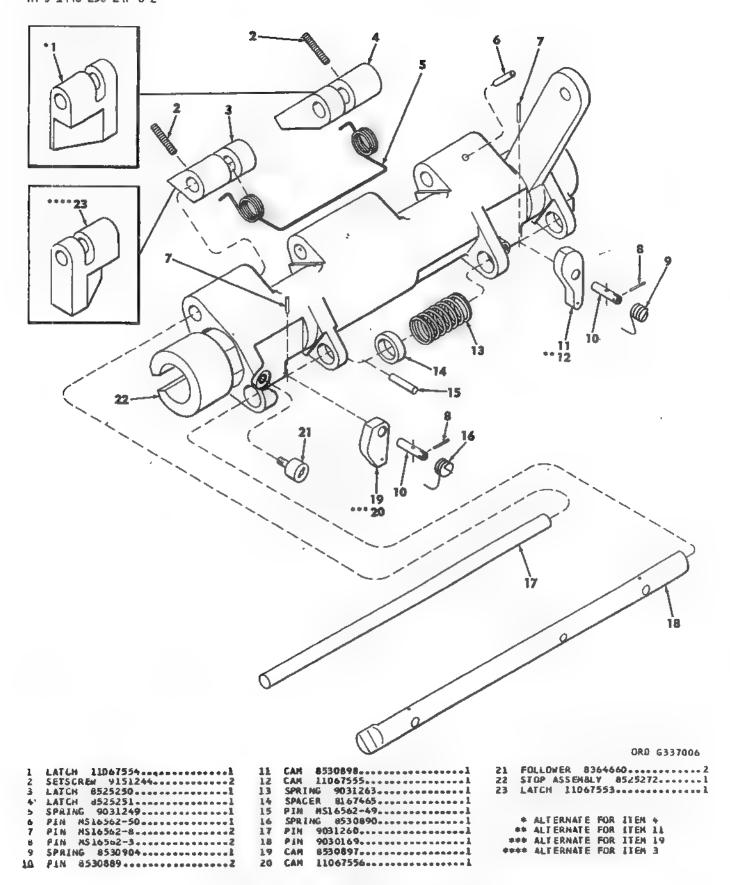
BRAKE, LAUNCHING RAIL /8525285/ /SEE FIGURE 9 FOR NEXT HIGHER ASSEMBLY/
